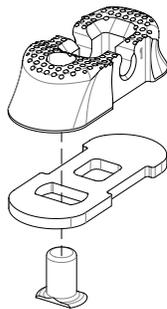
A: Seattle Kinetic and Seattle Kinetic Edge - Dorsi stop inserted into pad spacer and bumper.
